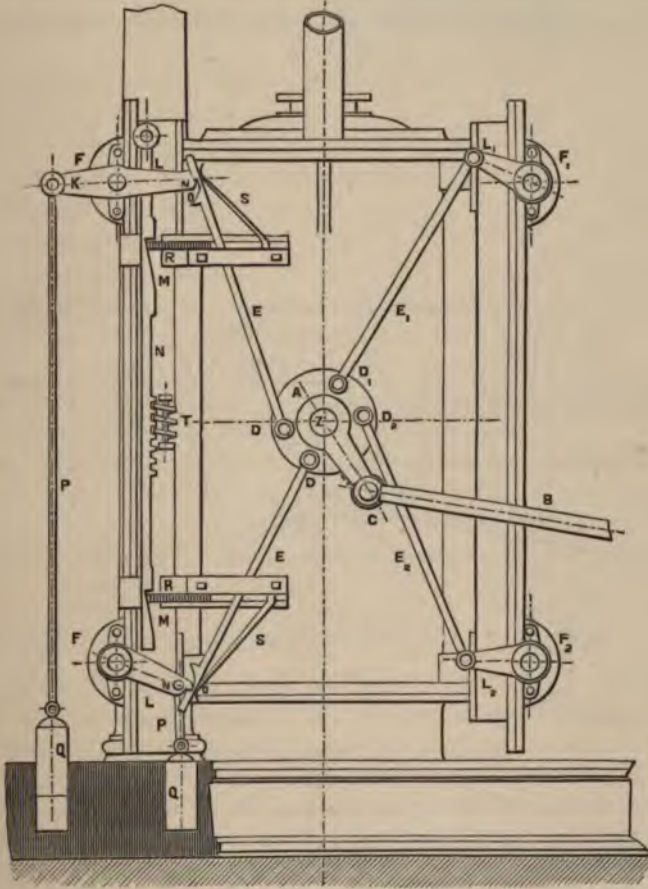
Corliss Valve-gear. First Application to a Steam Engine.
